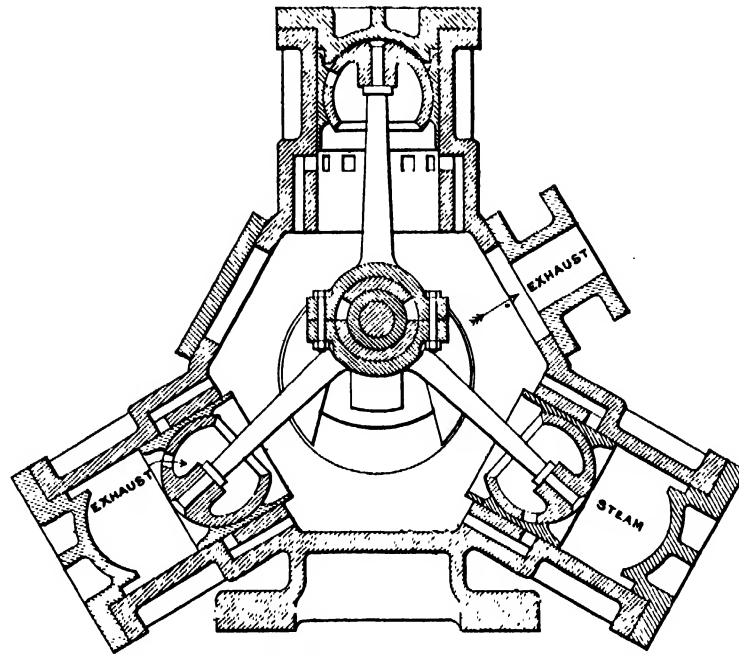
Brotherhood Three-Cylinder Engine. Side Section
